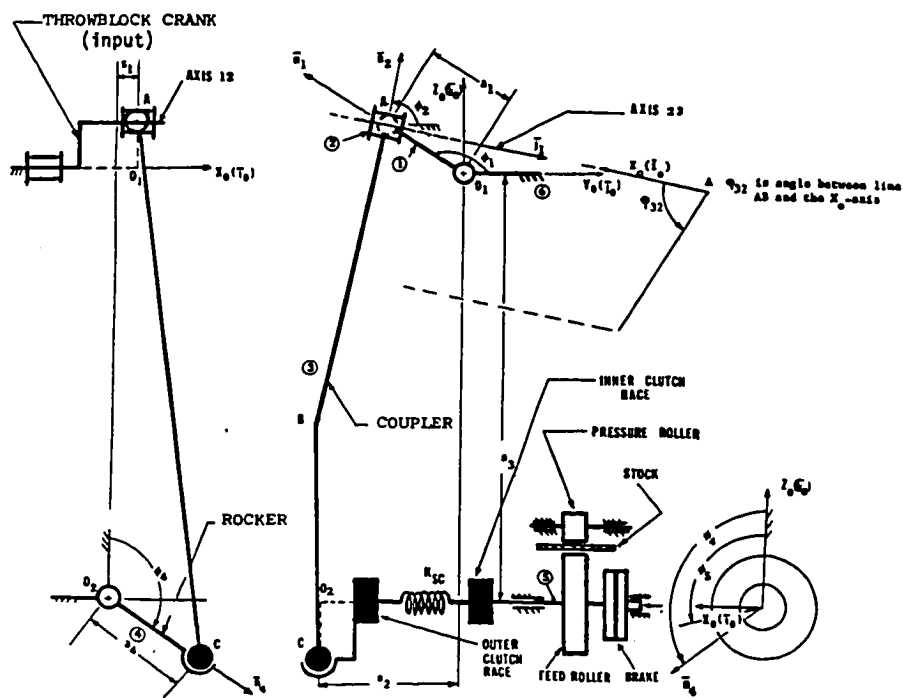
Schematic Drawing of Feed Mechanism with Replacement Linkage
